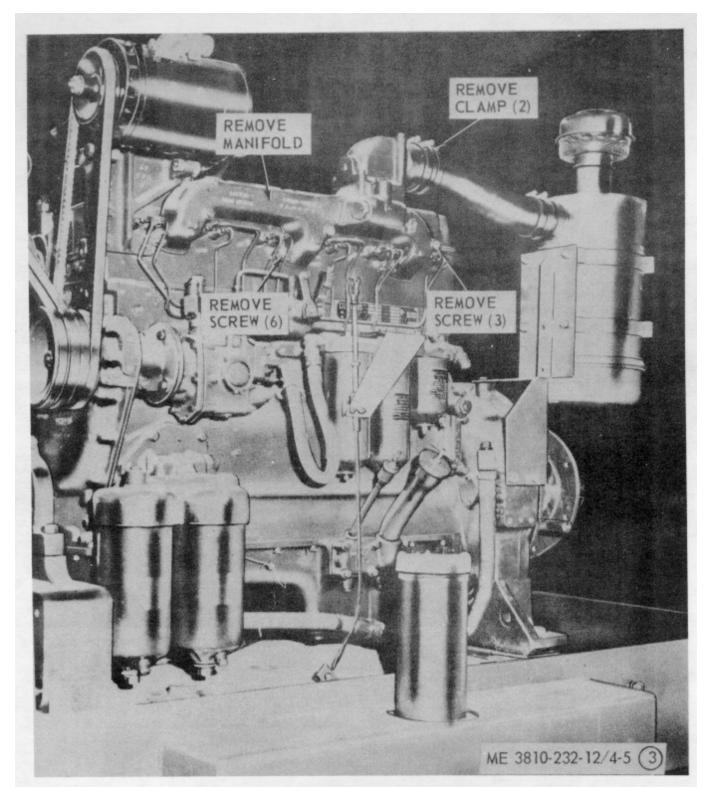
Crane engine exhaust assembly, intake and exhaust manifolds, removal and installation. Sheet 3 of4.
